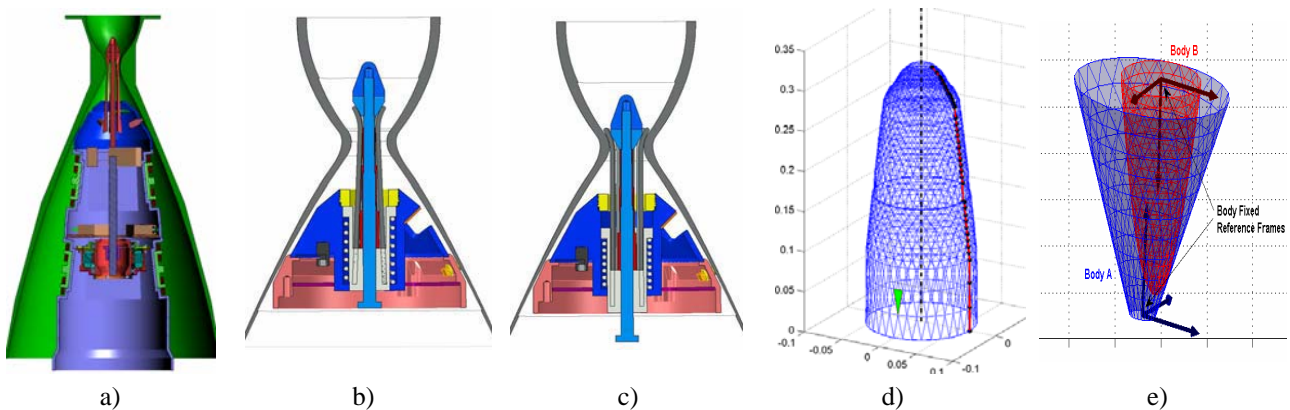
Capture Tool (a) diving into apogee motor cone; locking crown in open (b) and locked (c) configuration; contact shape definition CT alone (d) and CT with apogee motor cone (e)
